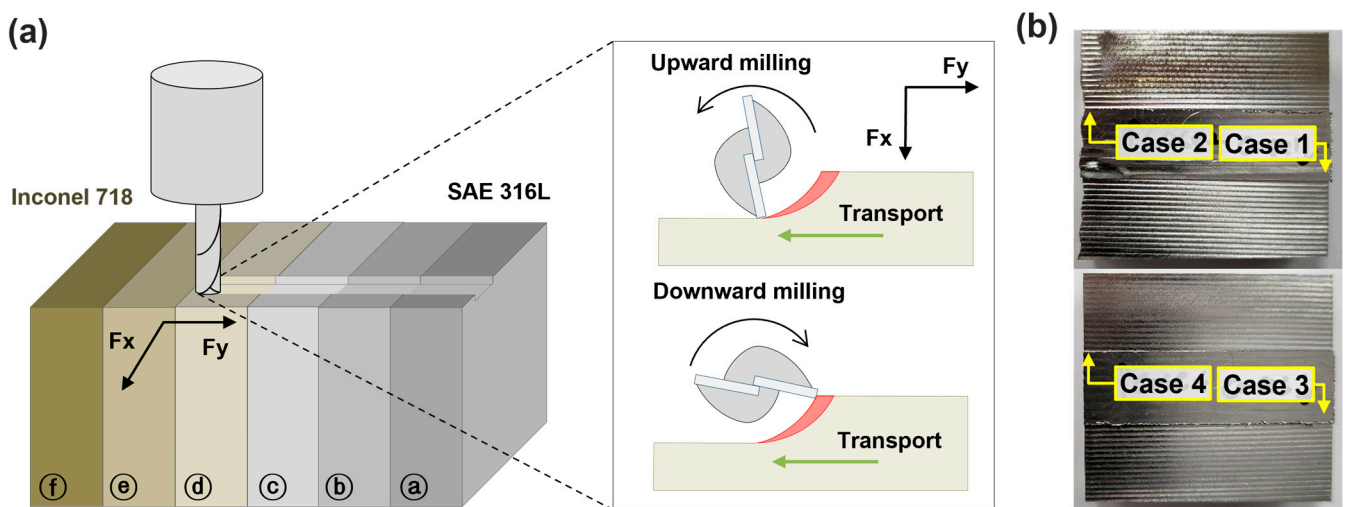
(a) Schematic diagram of the FGM machining process for milling methods and paths. (b) Photos of the milled surfaces of each experimental case.
